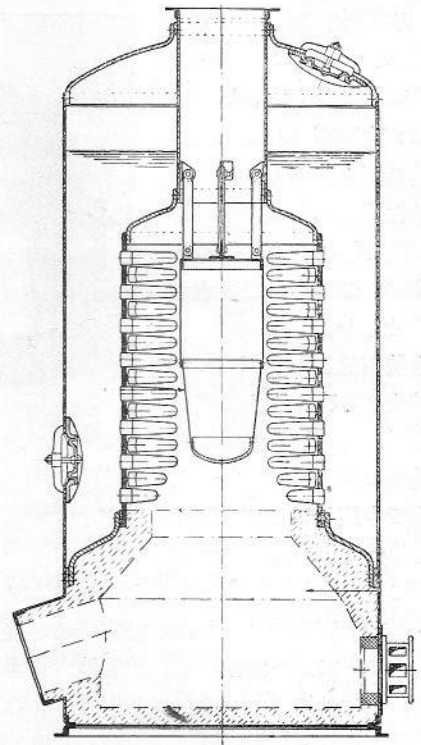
The new boiler arranged for exhaust gas or oil firing.
